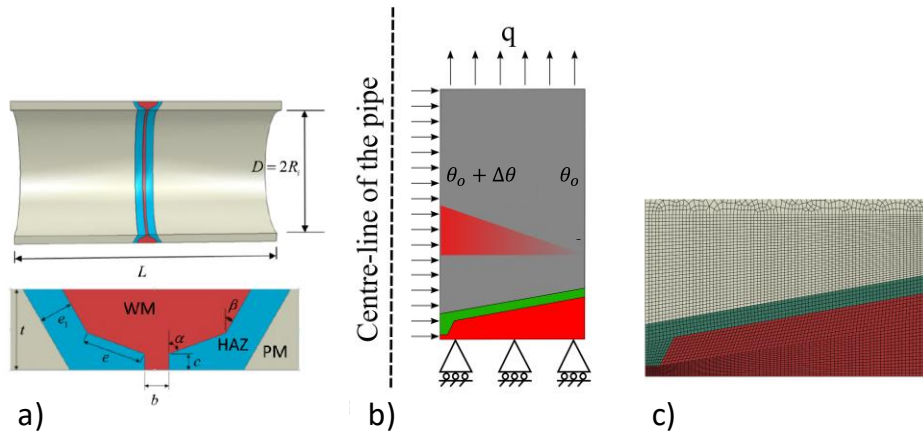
a) Butt-welded pipe geometry with principal geometrical parameters. b) Boundary condition and the load applied to the welded pipe; c) Mesh used for FEA.
